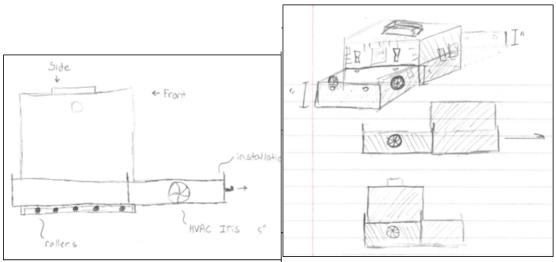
Drawing of Possible Drawer Concept Figure 10: Drawing of Possible Drawer Concept
